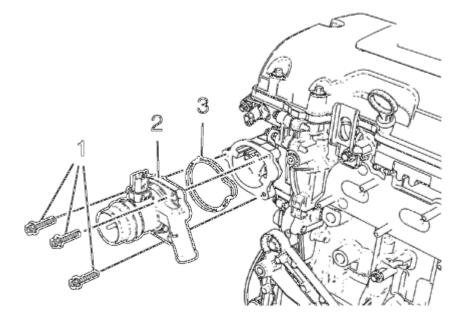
Locating Engine Oil Cooler Components Courtesy of GENERAL MOTORS COMPANY
